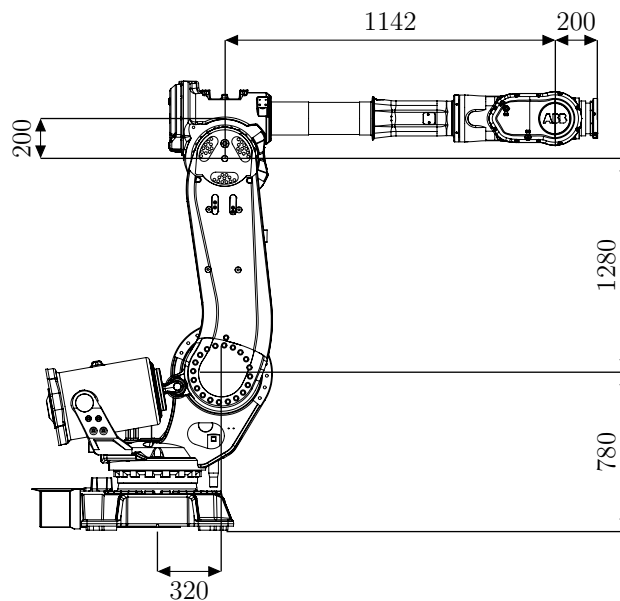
The dimensions of ABB IRB 6640 205/2.75 (mm) [188]
